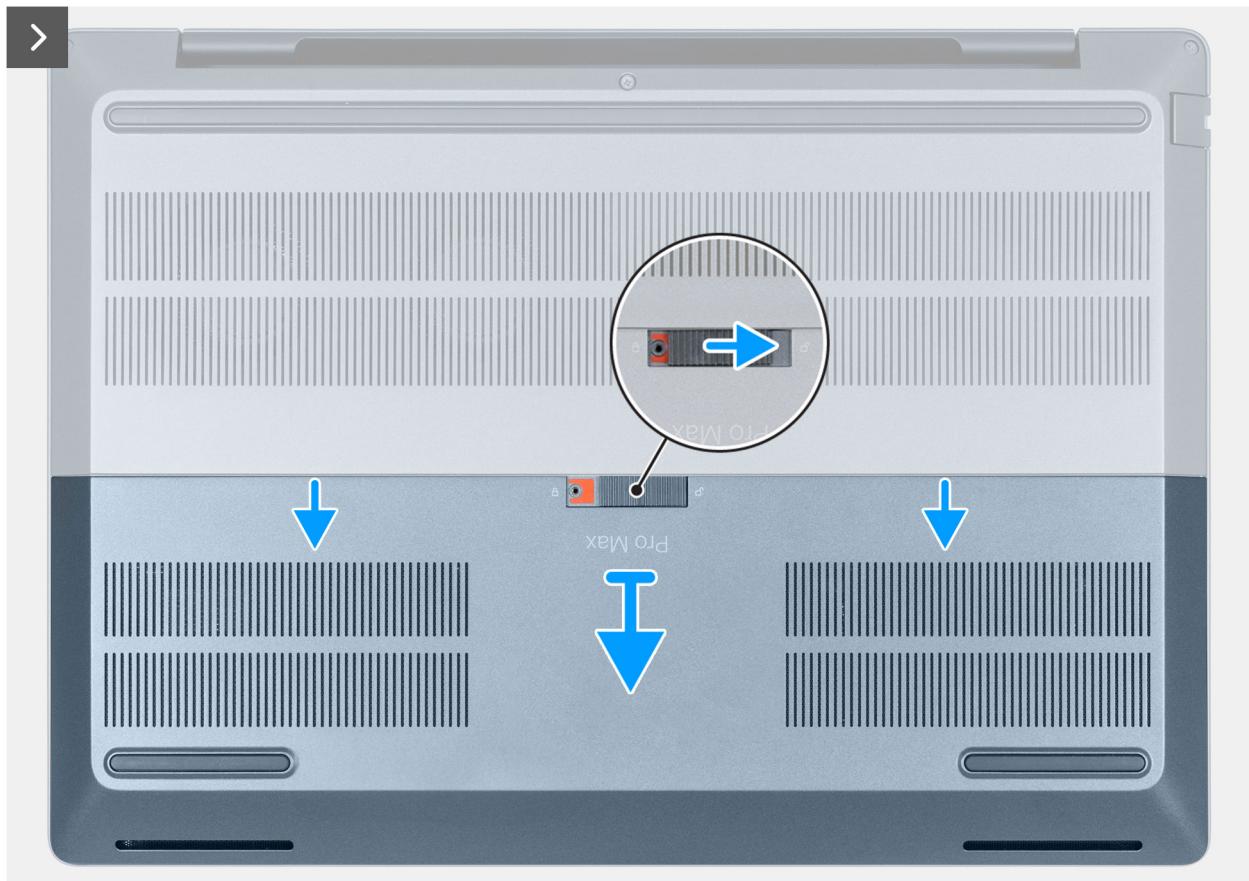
Sliding the door lock to the unlock position and removing the sliding door
